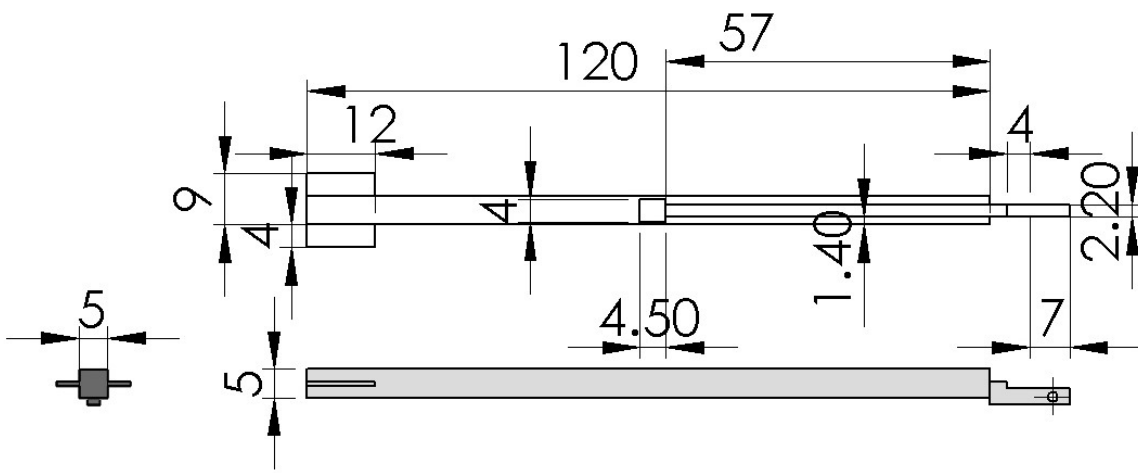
3 view drawing of the fabricated body of the flapping setup
